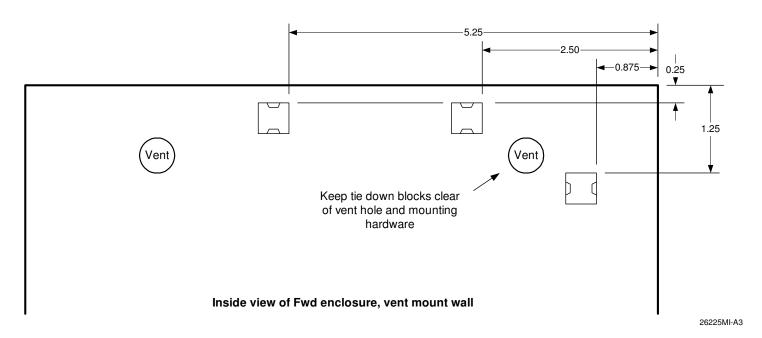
Tie block mounting locations inside FSU enclosure, Fwd (backplane) End (Fine detail omitted for clarity)
